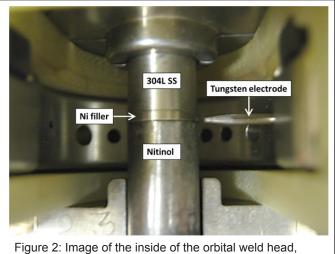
Image of the inside of the orbital weld head, showing the assembled components of the tube-to-tube joint
